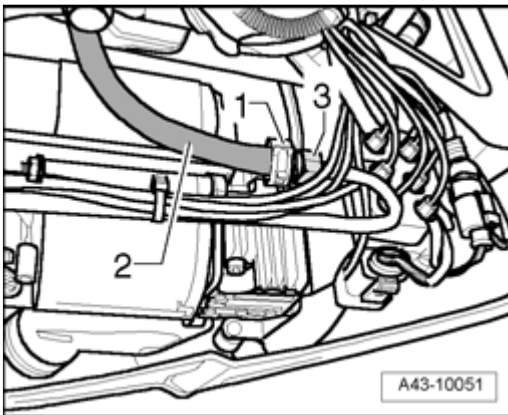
Opening Clamp And Disconnecting Intake Hose Of Connector Piece
